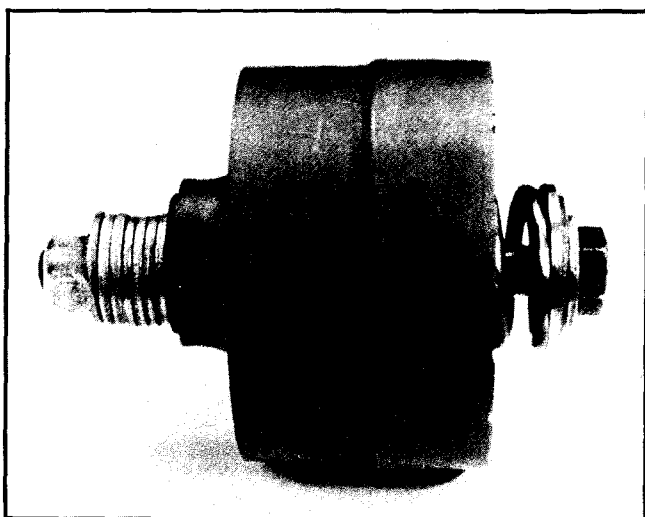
Cylinder block subassembly disassembly tool. (Tighten nut, remove snap ring, loosen nut to relieve spring tension).
